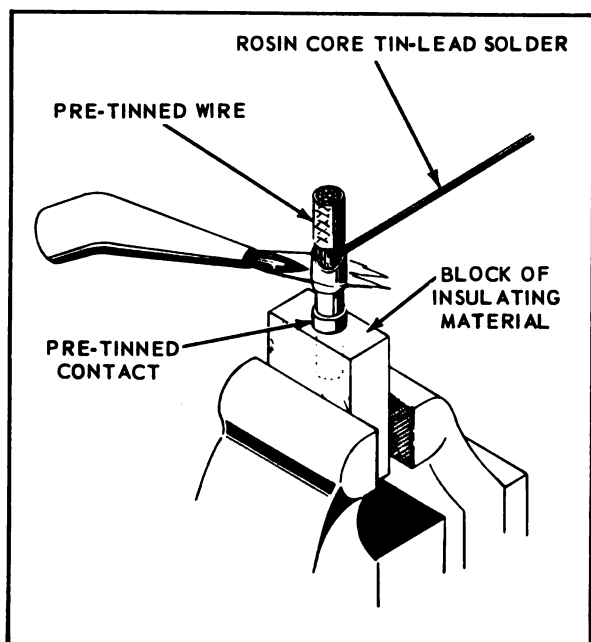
Torch Soldering Thermocouple Wire to MS Connector Contact
